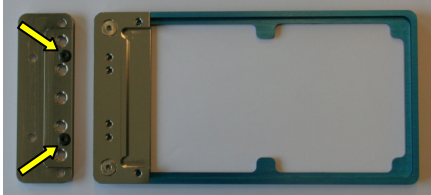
Place the O-rings in the recesses on the bottom side of the Frame top.
